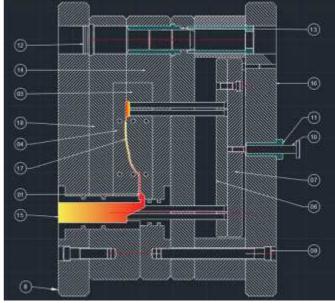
Ballooning of Pressure Die Casting of Door Handle
